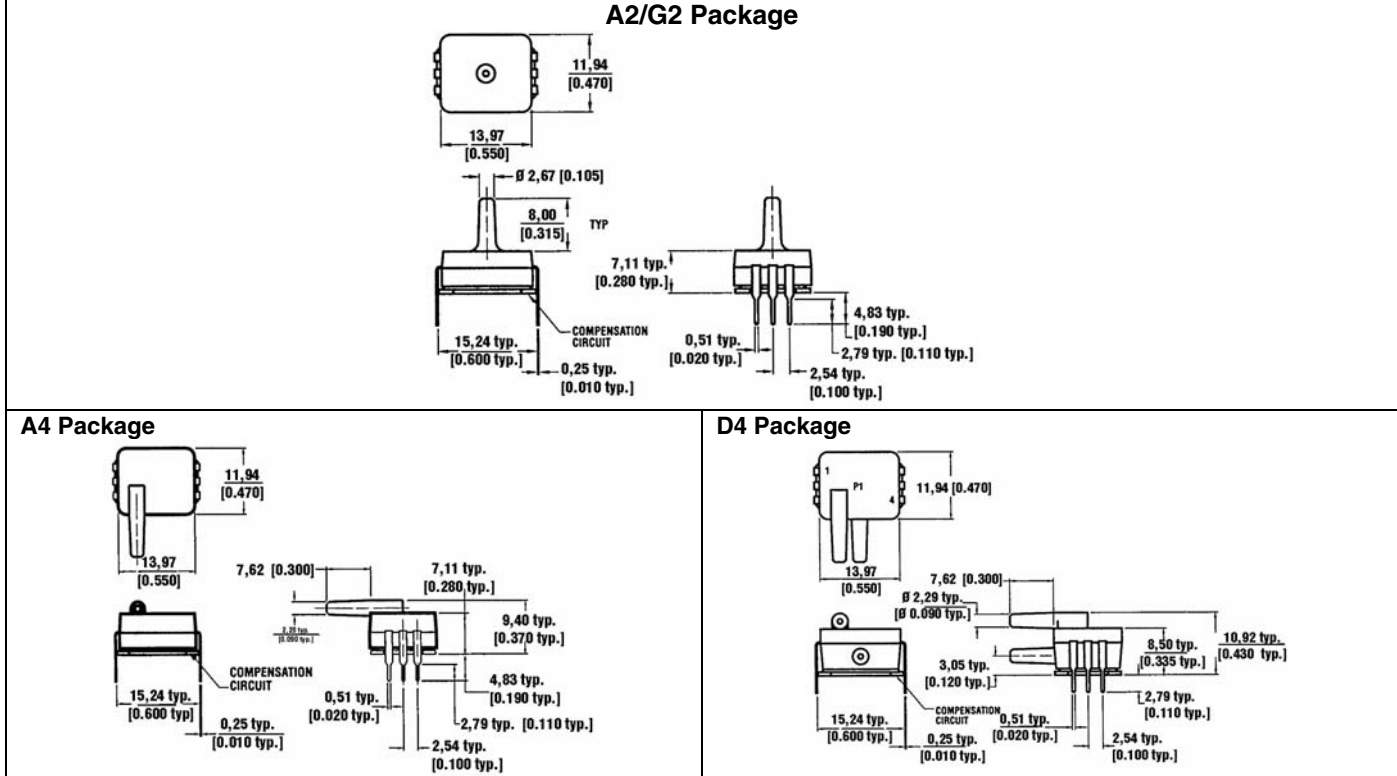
Mounting Dimensions (For Reference Only. mm/[in])
